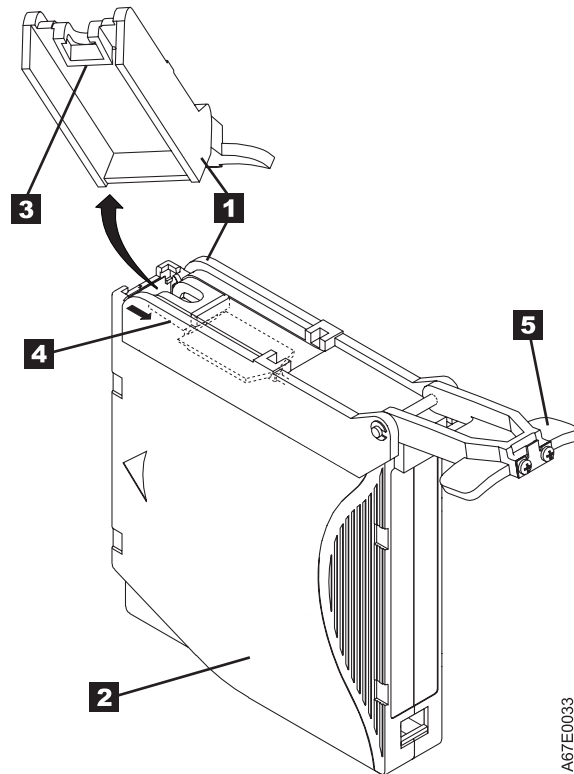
Attaching the leader pin attach tool to an Ultrium Tape Cartridge. To hold the cartridge door open, hook the tool into the door and pull the tool back.
